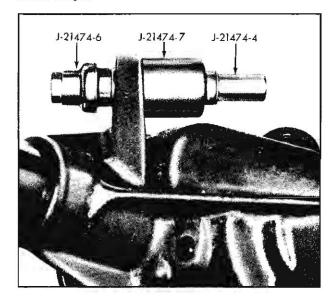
Installing Rear Upper Control Arm Rear Bushing
